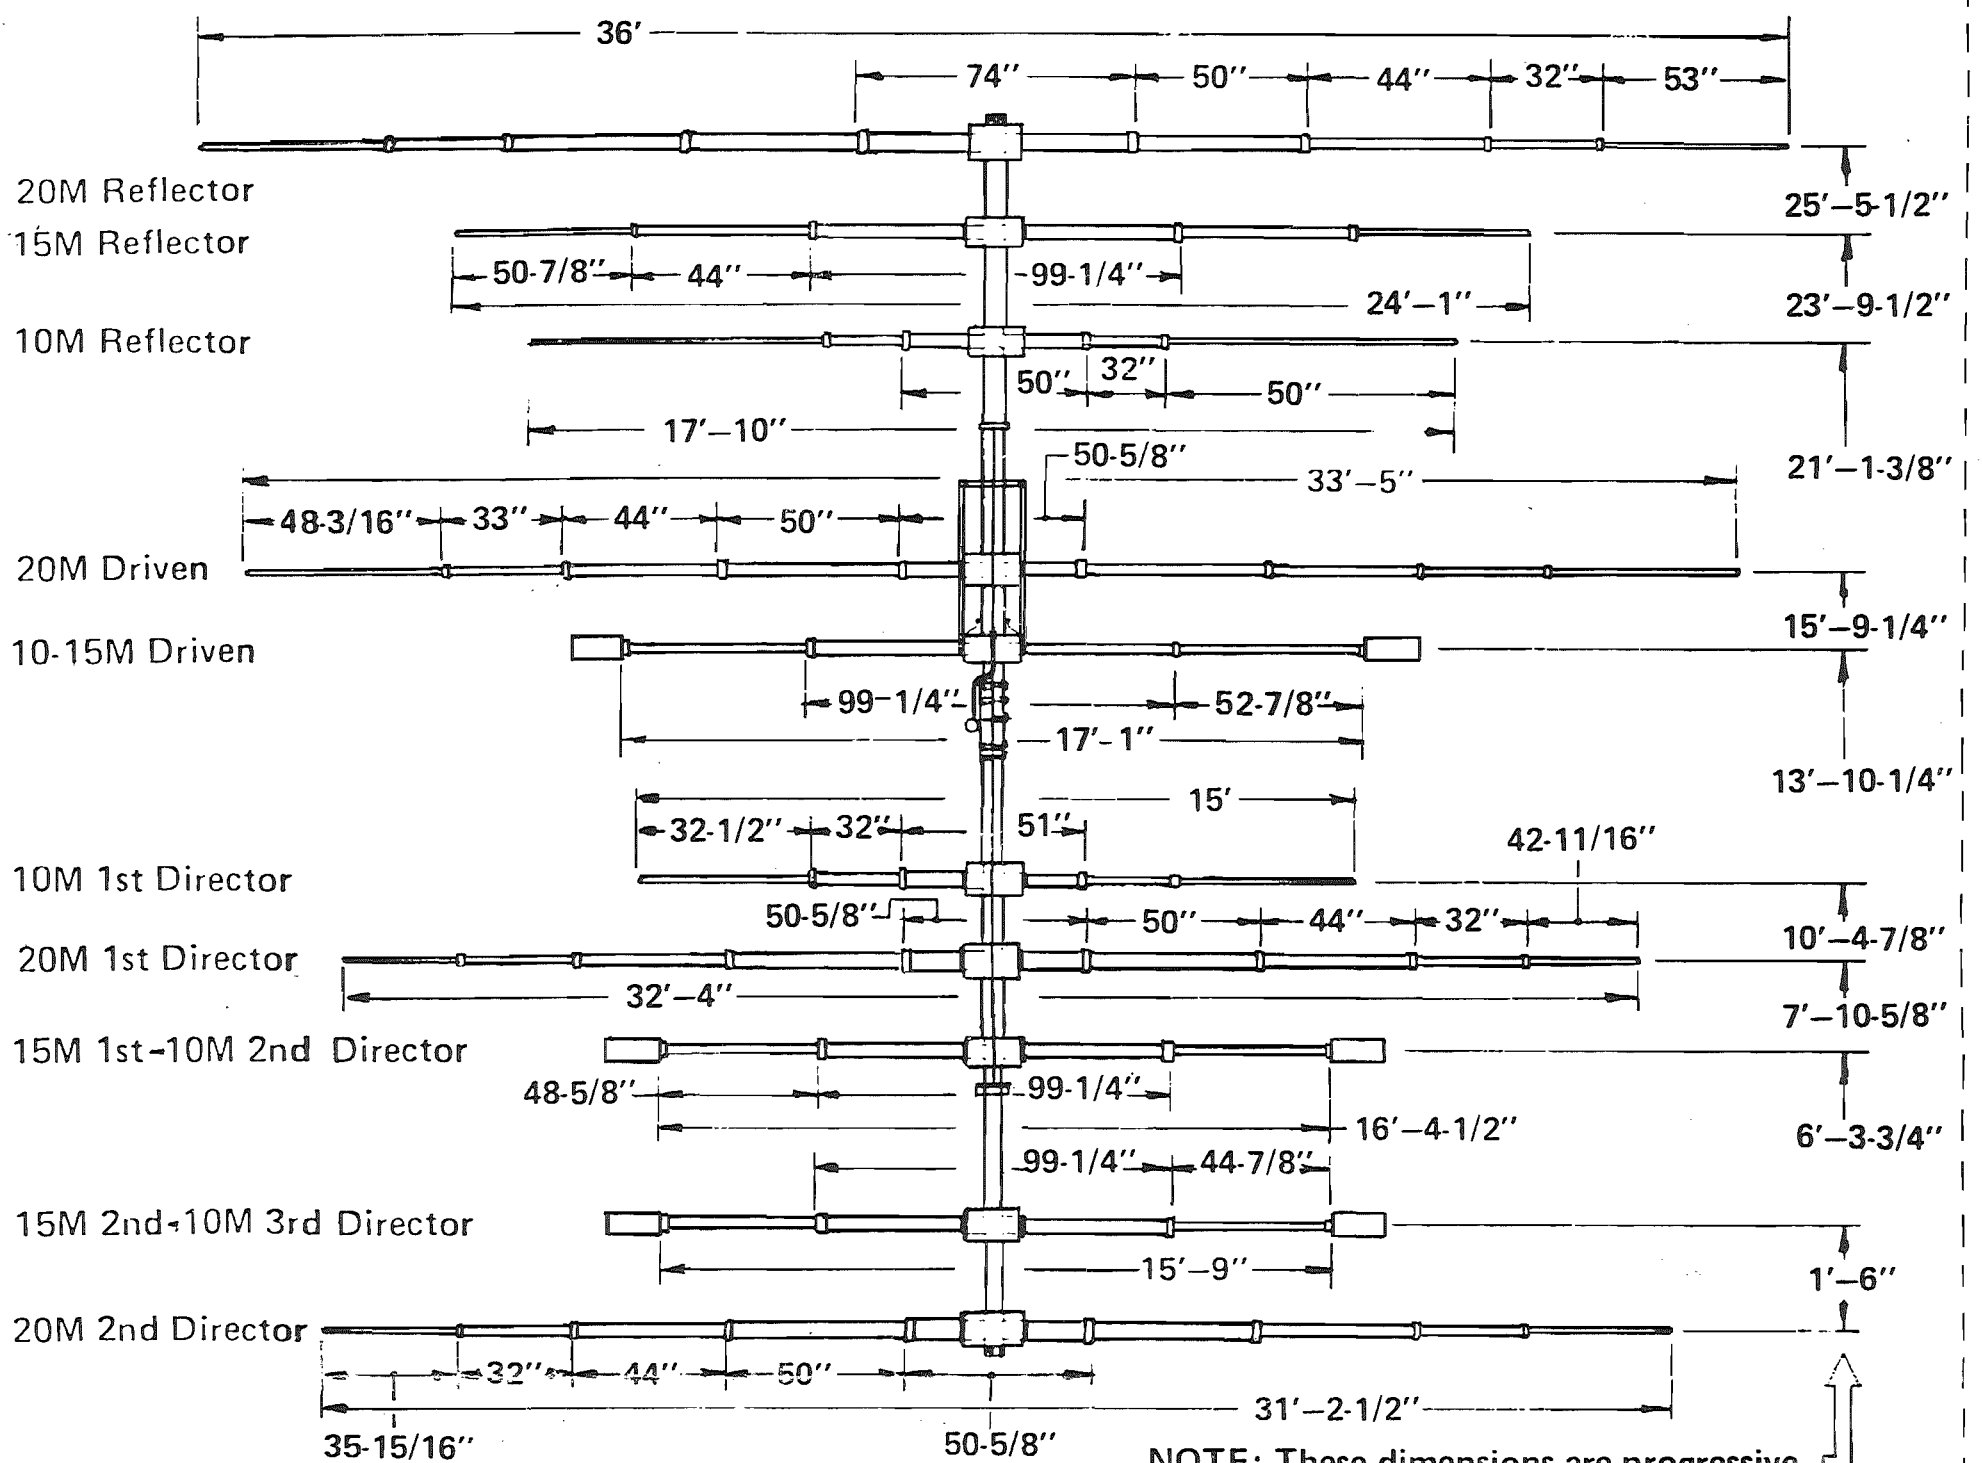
and 4 show a top view of the assembled antenna, and gives part numbers and principal dimensions for assembling and installing the elements. Refer to the parts list for complete descriptions and specifications and to Figures 6 – 8 for specific assembly details and hardware call outs.
